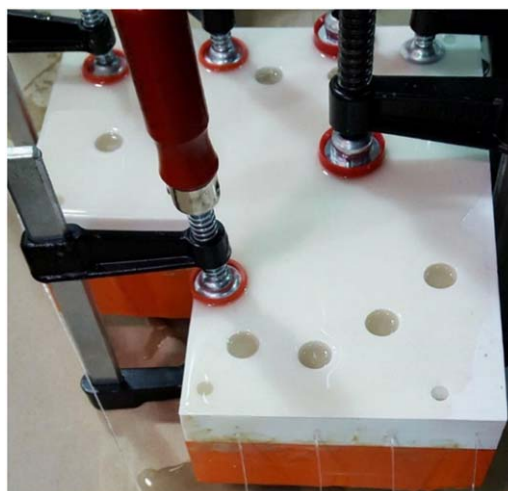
Mold is properly clamped, and silicone is poured in all holes.
